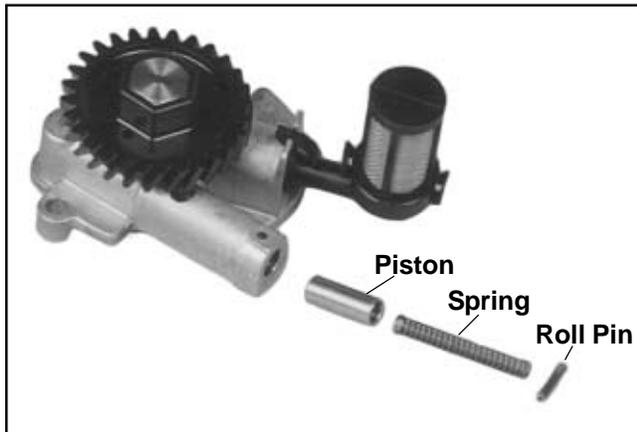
Oil Pressure Relief Valve Piston and Spring.
